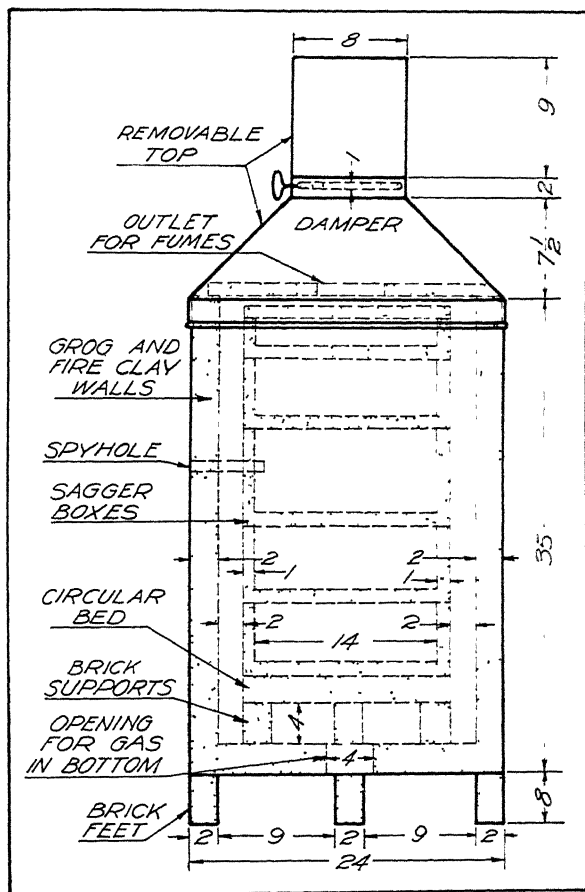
This is an iron-barrel kiln, and is shown merely to suggest possible methods for making an experimental kiln. It is packed from the top by removing the sheet-iron cover. The ware is packed in saggars. The fuel should be oil or gas, fed from the bottom.
